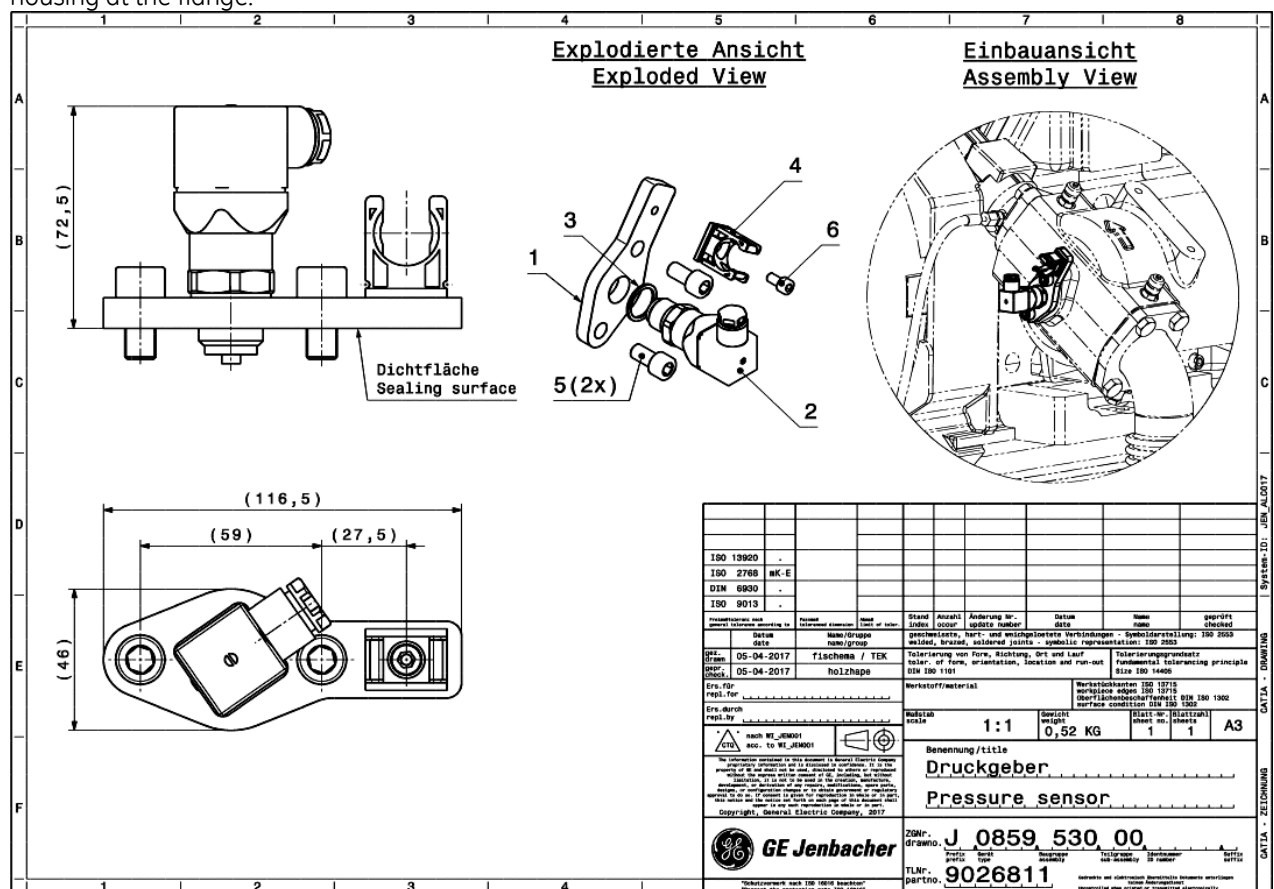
Drawing – oil filter differential pressure module – TL9026811
